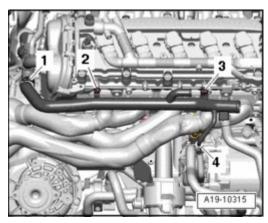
Removing Bolts, Loosening Hose Clamps And Removing Right Coolant Pipe From Coolant Hoses
